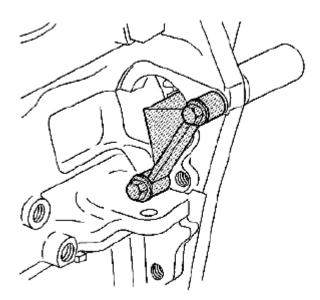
Identifying Engine Flywheel Bolts Courtesy of SUZUKI OF AMERICA CORP.
